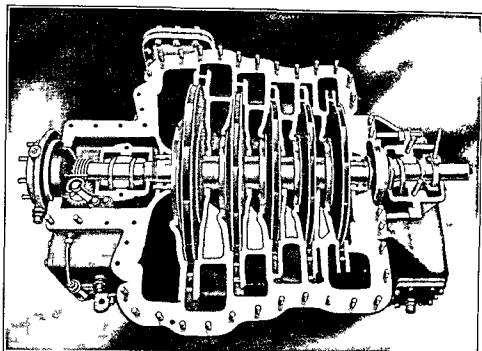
Centrifugal Compressor *(Courtesy of Carrier Co p)
